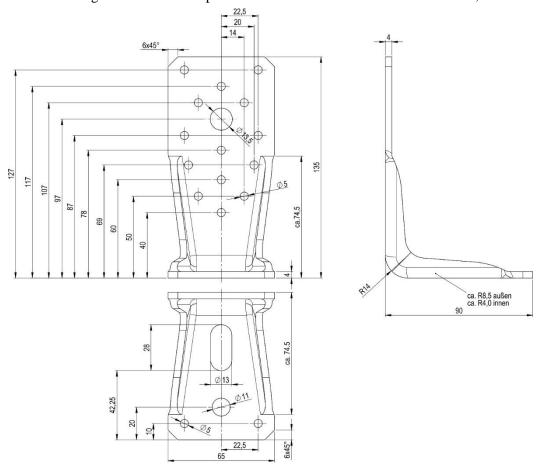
Dimensions of Angle Bracket KR 135, thickness 4,0 mm
